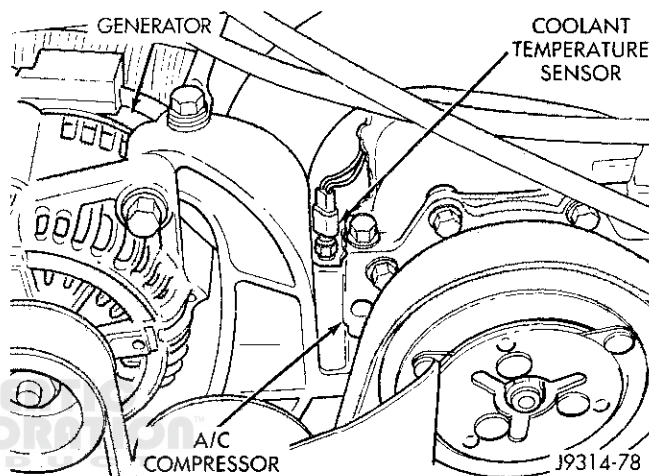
Engine Coolant Temperature Sensor—3.9L/5.2L/5.9L Engines—Typical
